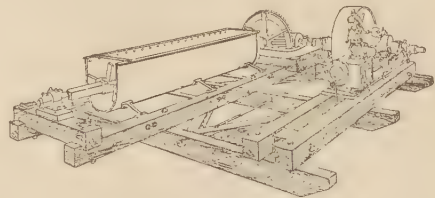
All-iron single-shaft pug-mill with direct connected engine.
